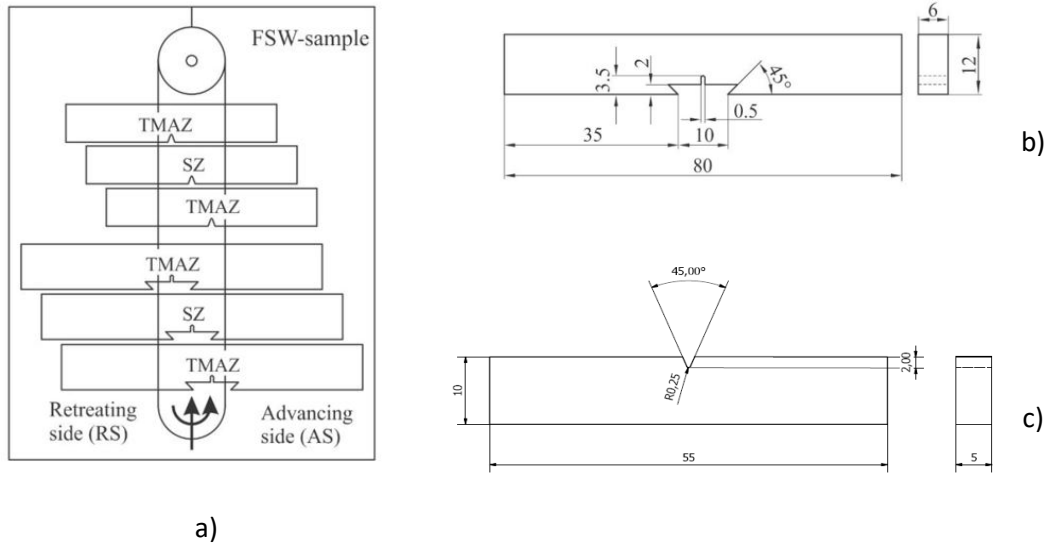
Subtraction of the plate specimen for the fracture toughness testing and Sharp impact test (a); Dimension of specimen for the fracture toughness testing (b); and Sharp impact test specimens (c)
